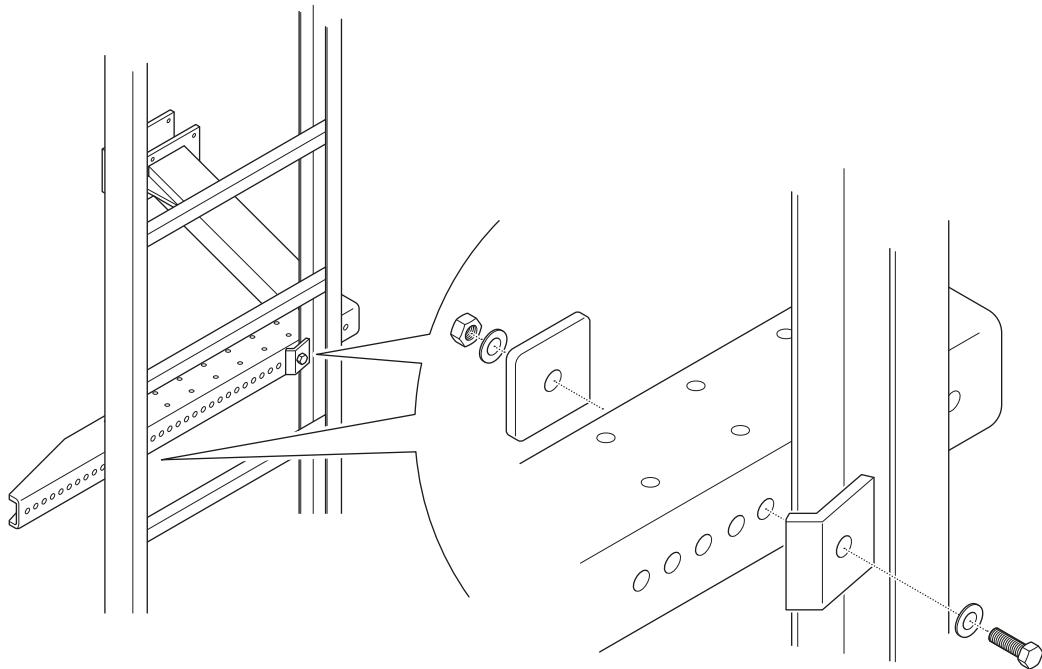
Attach platform mounting beam to the Glass Elevator with a fixation plate
